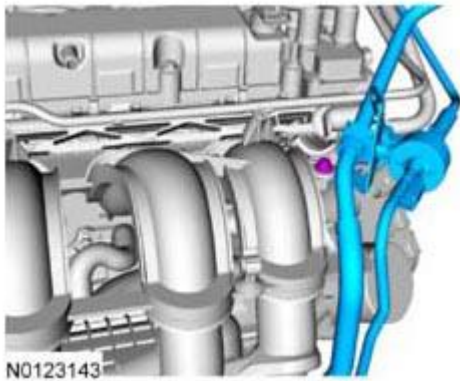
Identifying EVAP Canister Purge Valve Bolt
